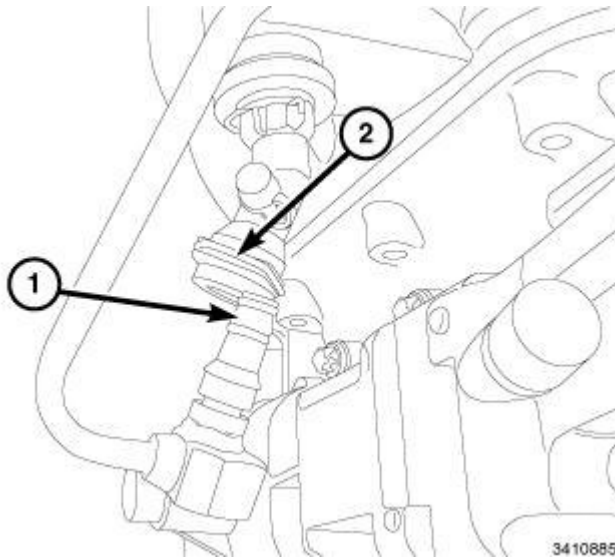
Hydraulic Supply Pipe & Concentric Slave Cylinder
